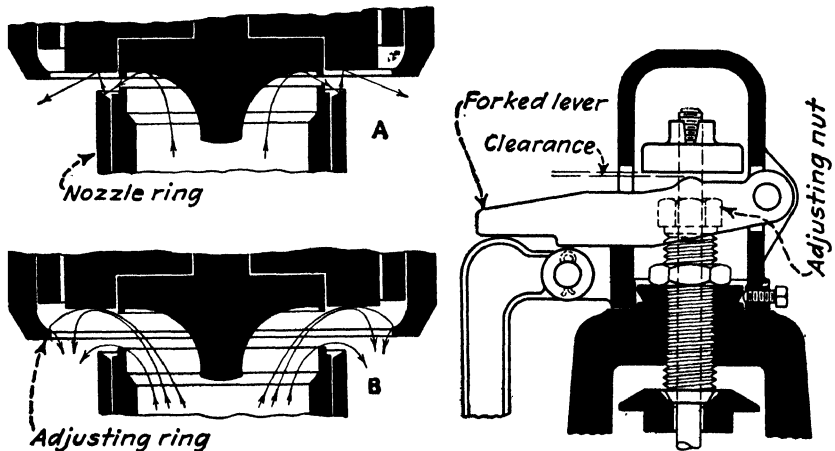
Steam pressure overcomes spring and lifts valve disk *A*. Then jet strikes nozzle ring and raises valve fully, *B*. (Courtesy of Crosby Steam Gage & Valve Co.)
